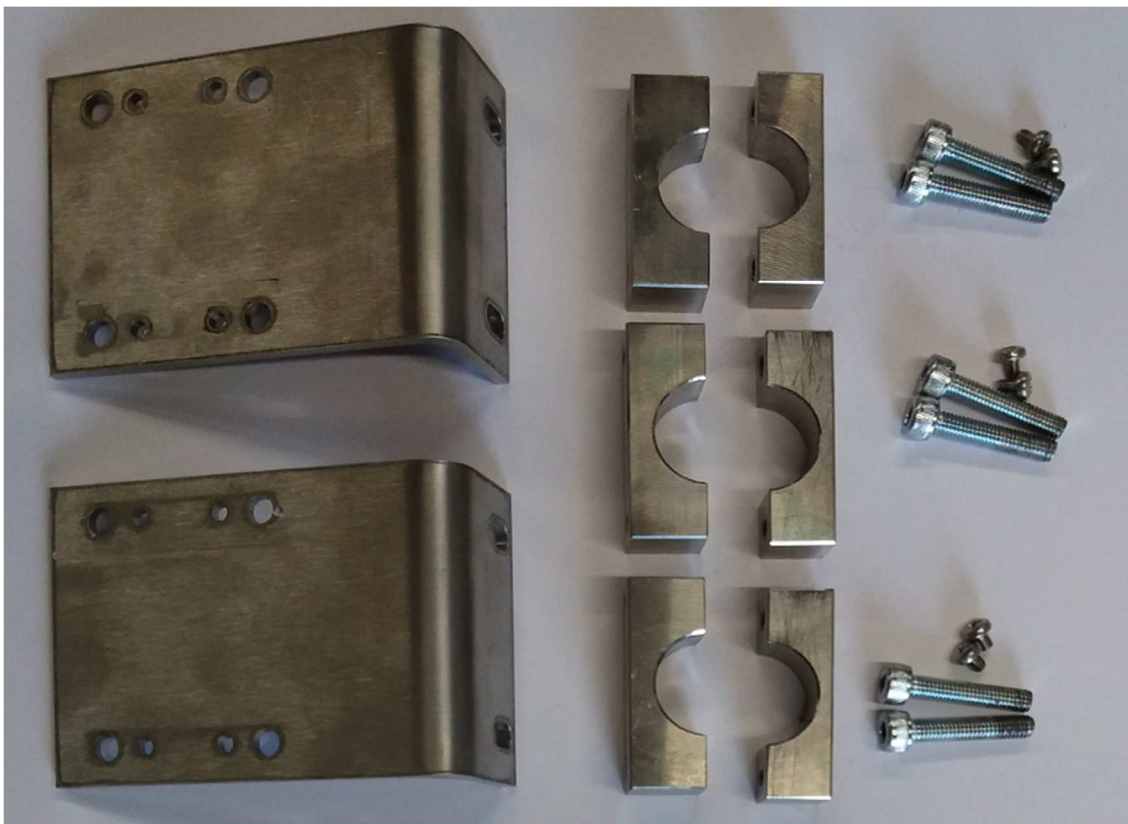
From left: positioner handles, clamps of valve columns, mounting screws.
